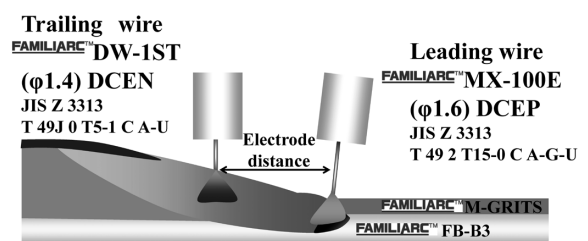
Schematic illustration of one-side tandem MAG welding method
